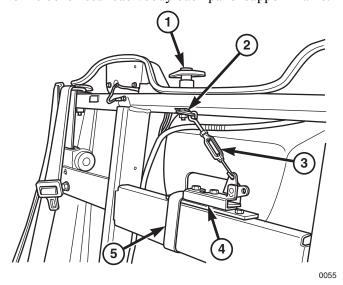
LINKSPAK/SWIVELPAK Latch Assembly
